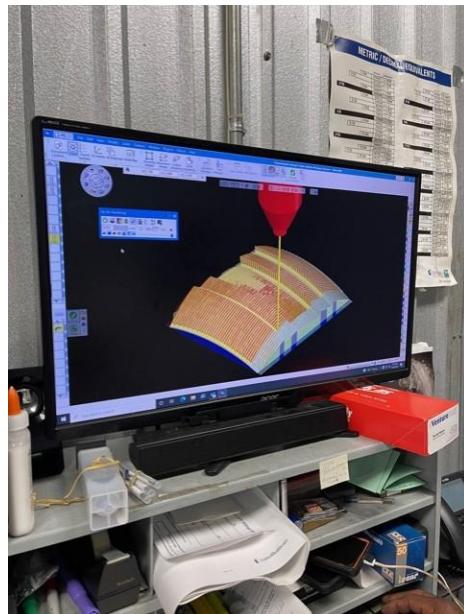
Shows GibbsCAM generating tool path for CNC machine.
